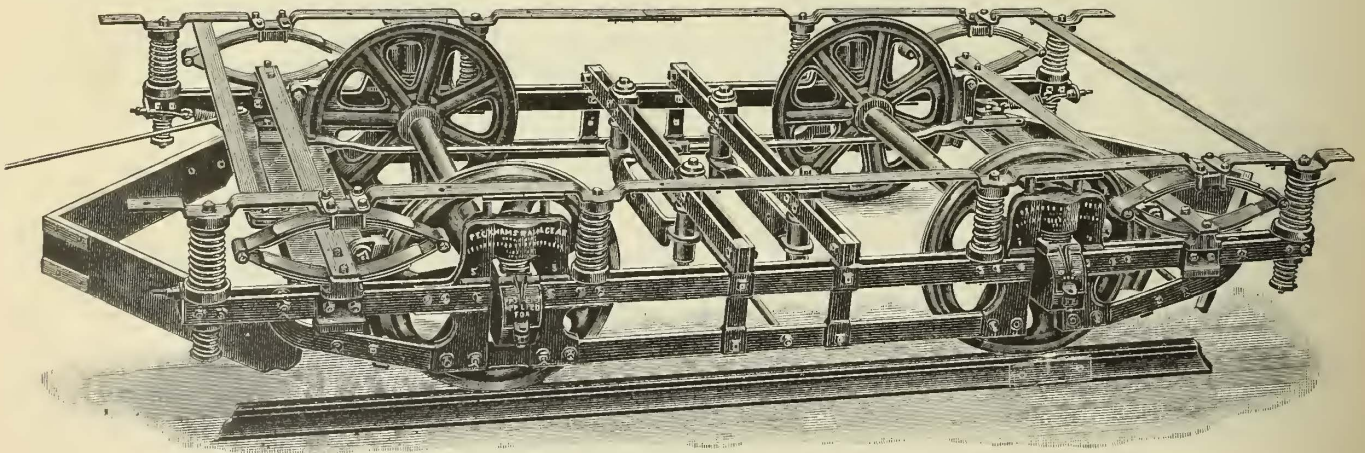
NO. 5A CANTILEVER EXTENSION TRUCK.
